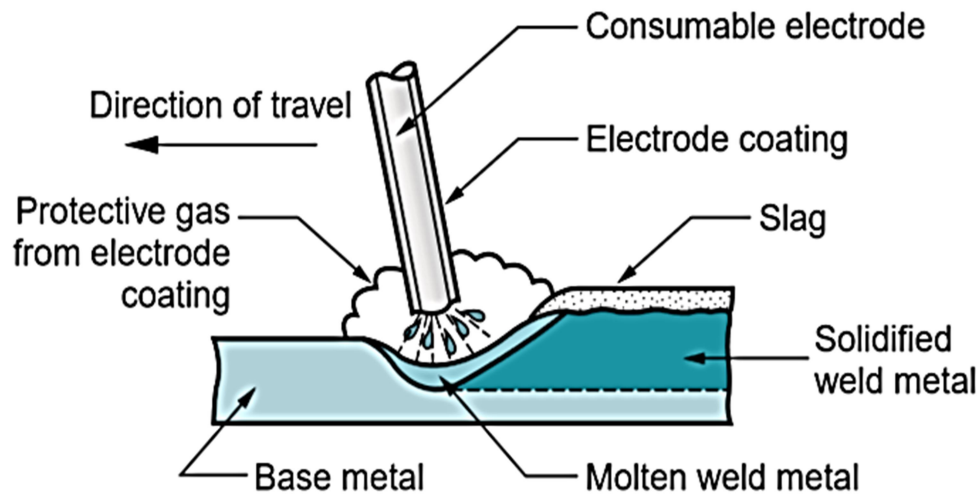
Shielded metal arc welding (SMAW).
